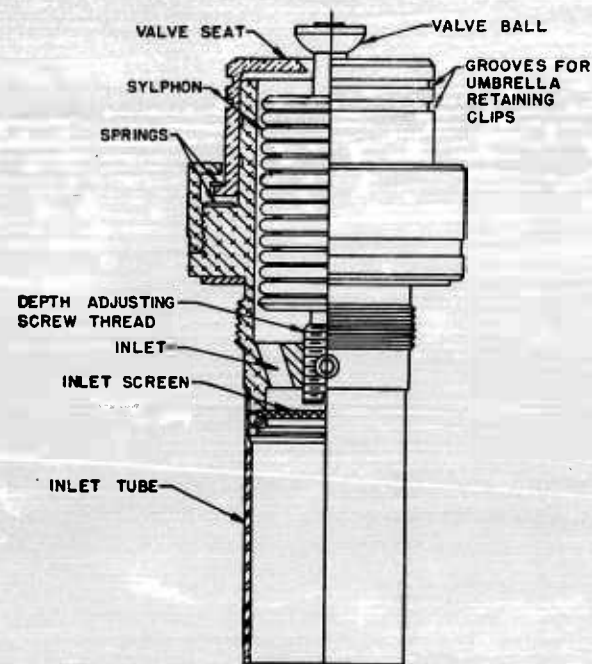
Assembly drawing of valve, showing sylphon, umbrella mounting, valves, and springs which provide derivative control.
